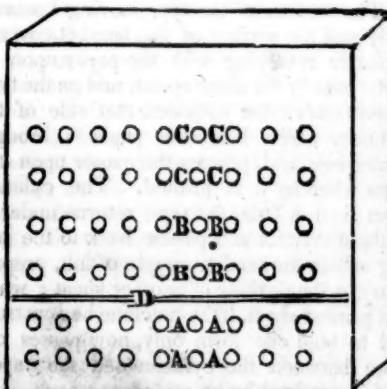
is a side view of the boiler A A B B., and C C, being the open end of the tubes through which the heated air from the furnace is to pass, as will be shown more
